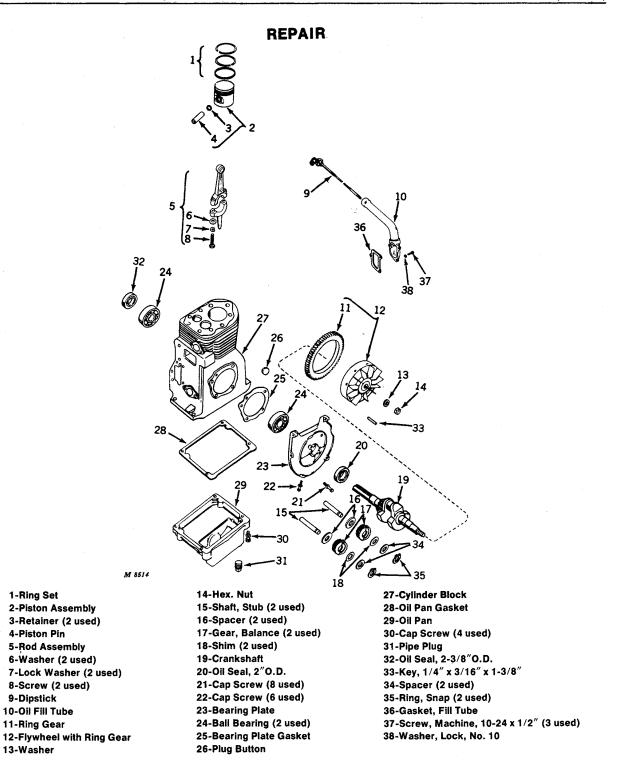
Exploded View Showing Piston, Connecting Rod, Crankshaft, Flywheel, Main Bearings and Oil Seals
